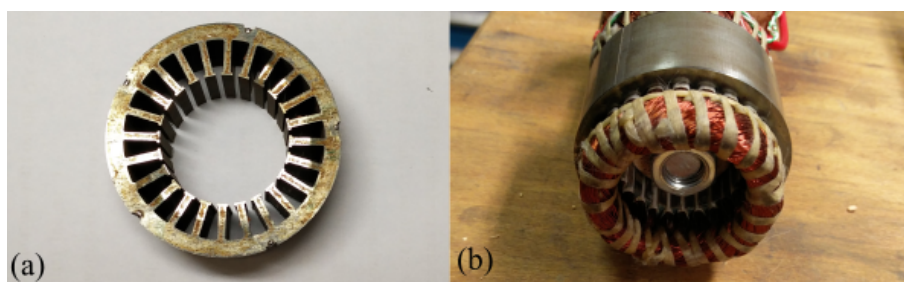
a) Top view of the stator laminations; b) stator after the winding assembly.
